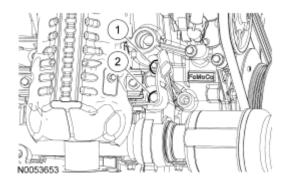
Locating Catalytic Converter Bracket Bolt & Nut
